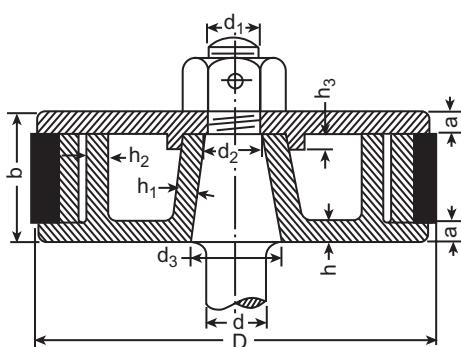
Cast-iron piston of diameter ≤ 400 mm (16.0 in.).
